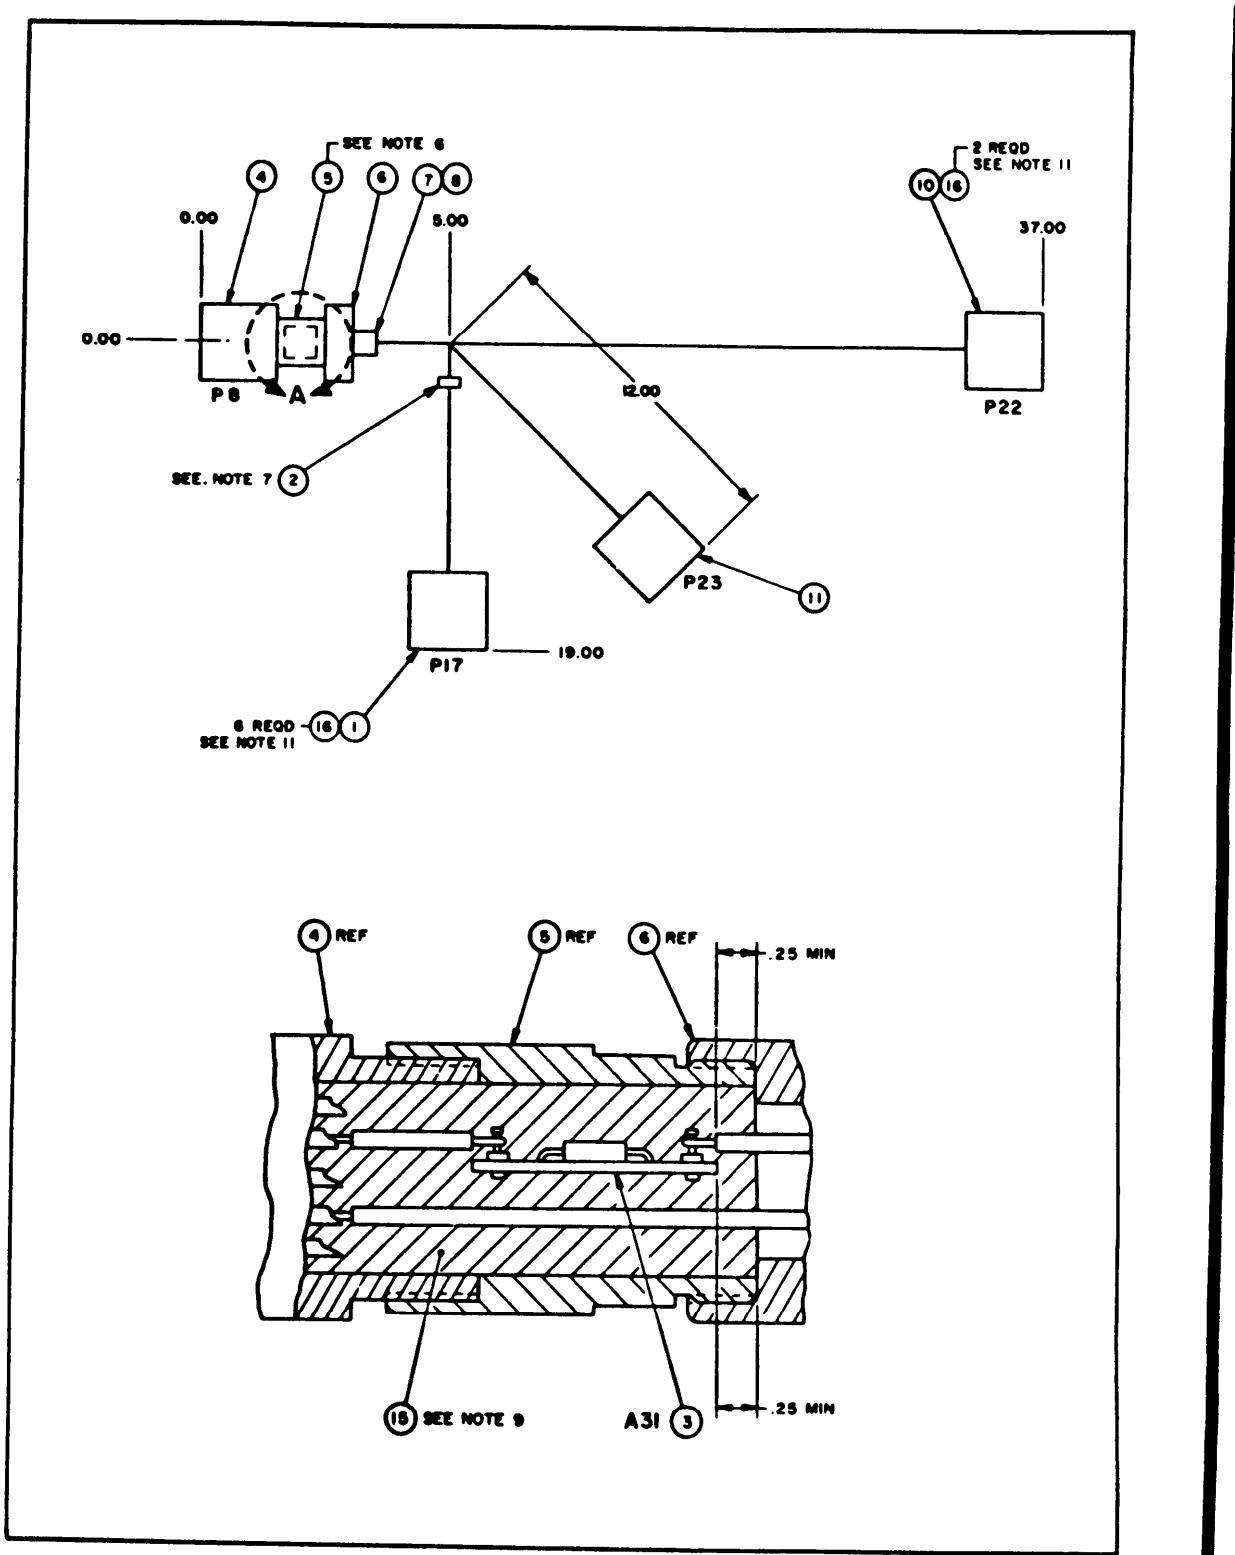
400 Hz Electric Governor System Wiring Harness Assembly Drawing No. 84-704
